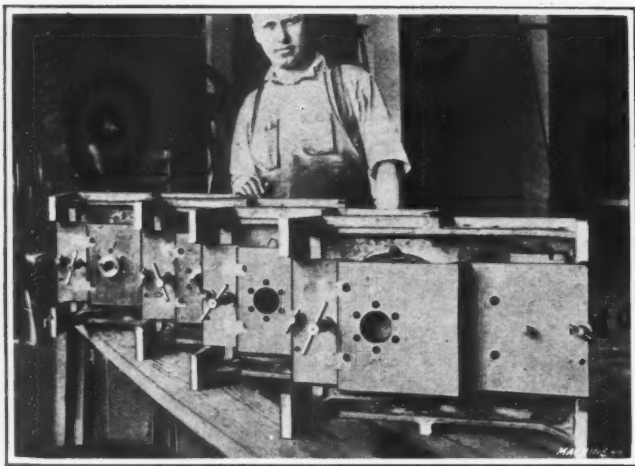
Four Jigs having Holes machined within Tolerances of 0.0005 inch by the Method described
